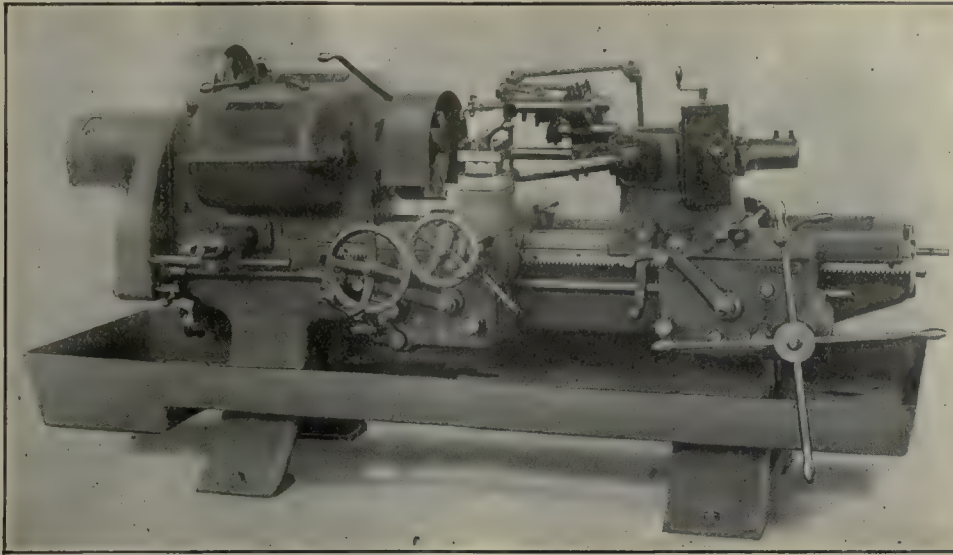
FOSTER NO. 2-B UNIVERSAL TURRET LATHE WITH CHUCKING EQUIPMENT
